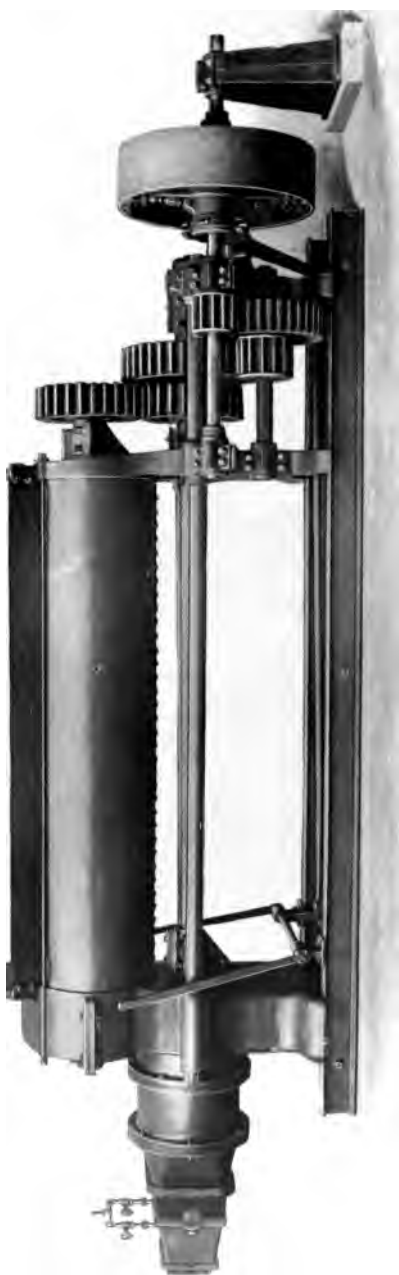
PLATE XI. — HENRY MARTIN "UNION" AUGER MACHINE.
